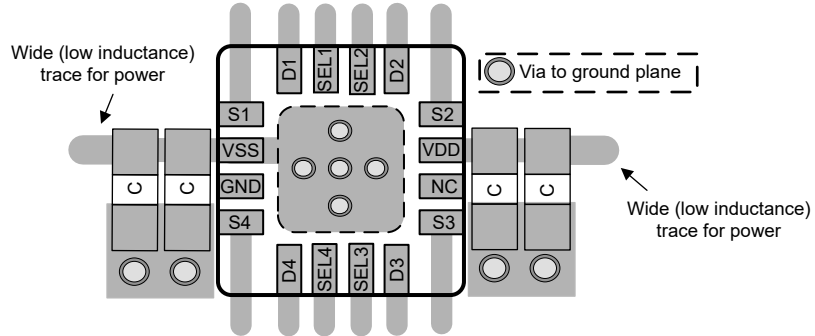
shows an example of a PCB layout with the TMUX7612.
